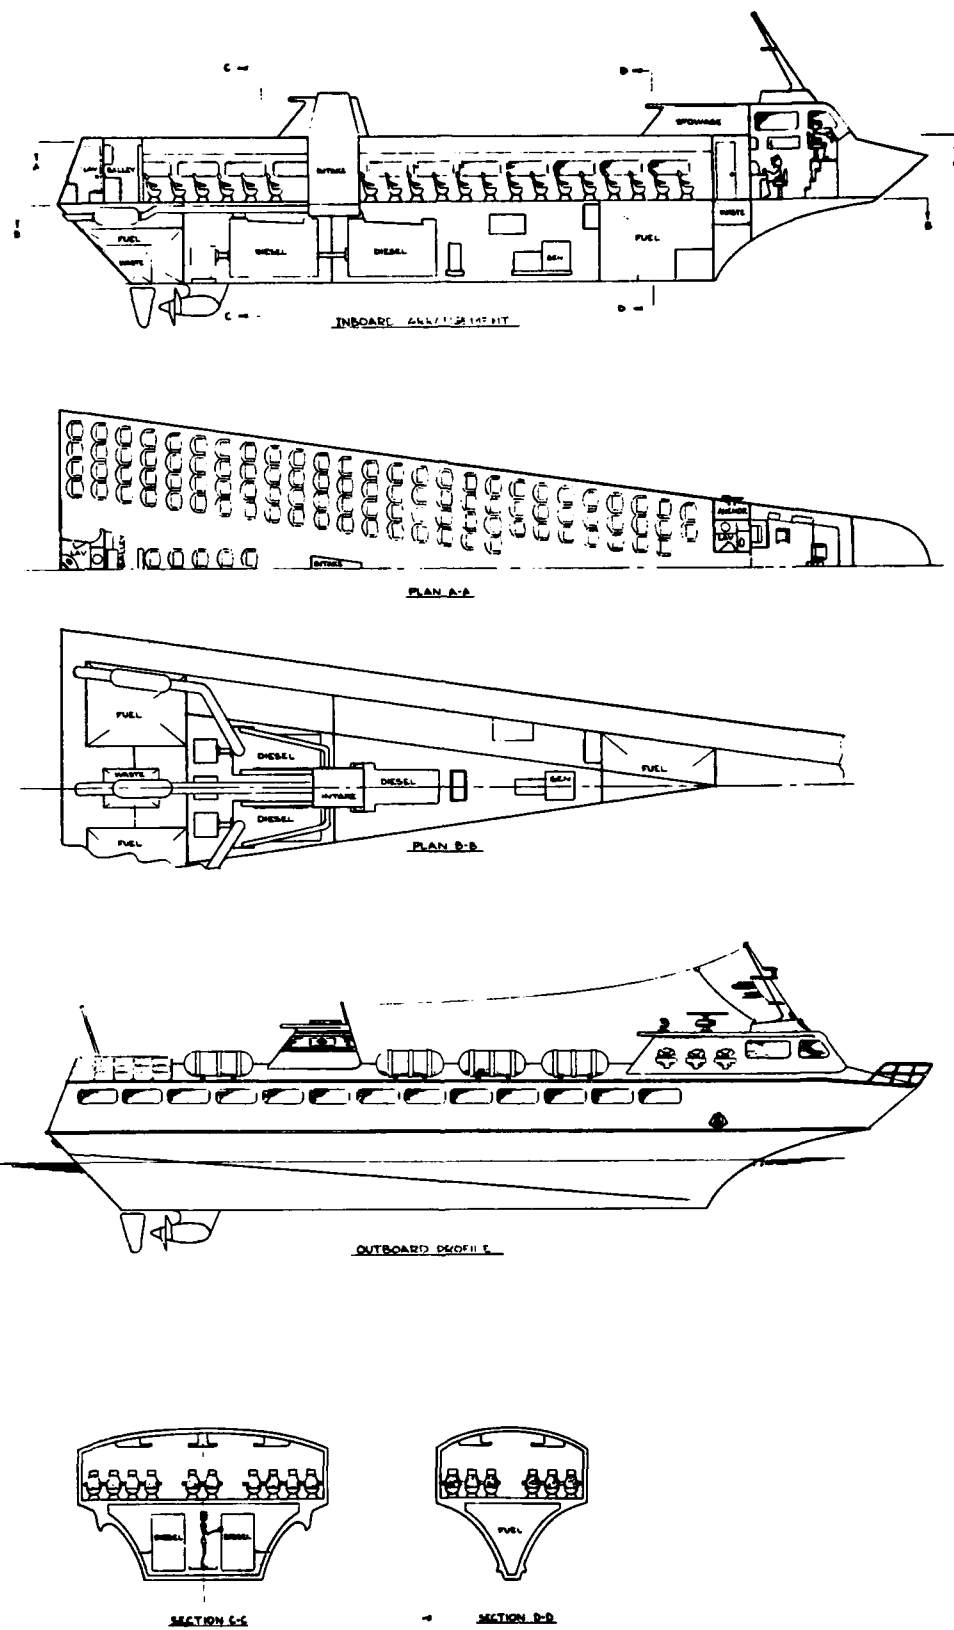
Passenger Ferry, Outboard Profile and Arrangements.
